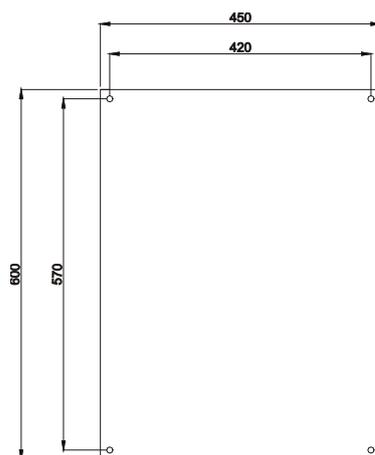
Wall-mounting hole position of the plate 450x600 mm
